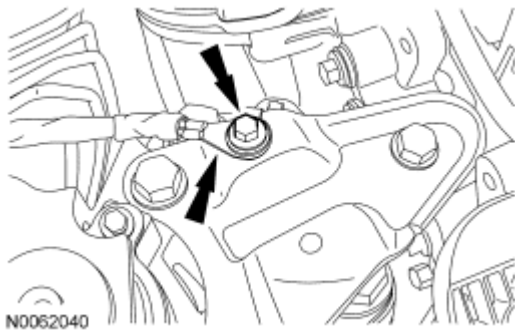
Identifying Ground Wire Bolt From Engine Mount Brace
